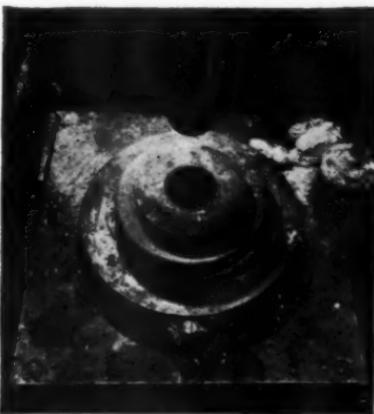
When changing over from steel to Carboloy dies for the deep drawing of sheet metal, it is generally unnecessary to make changes in press operation, lubrication, or die design.
